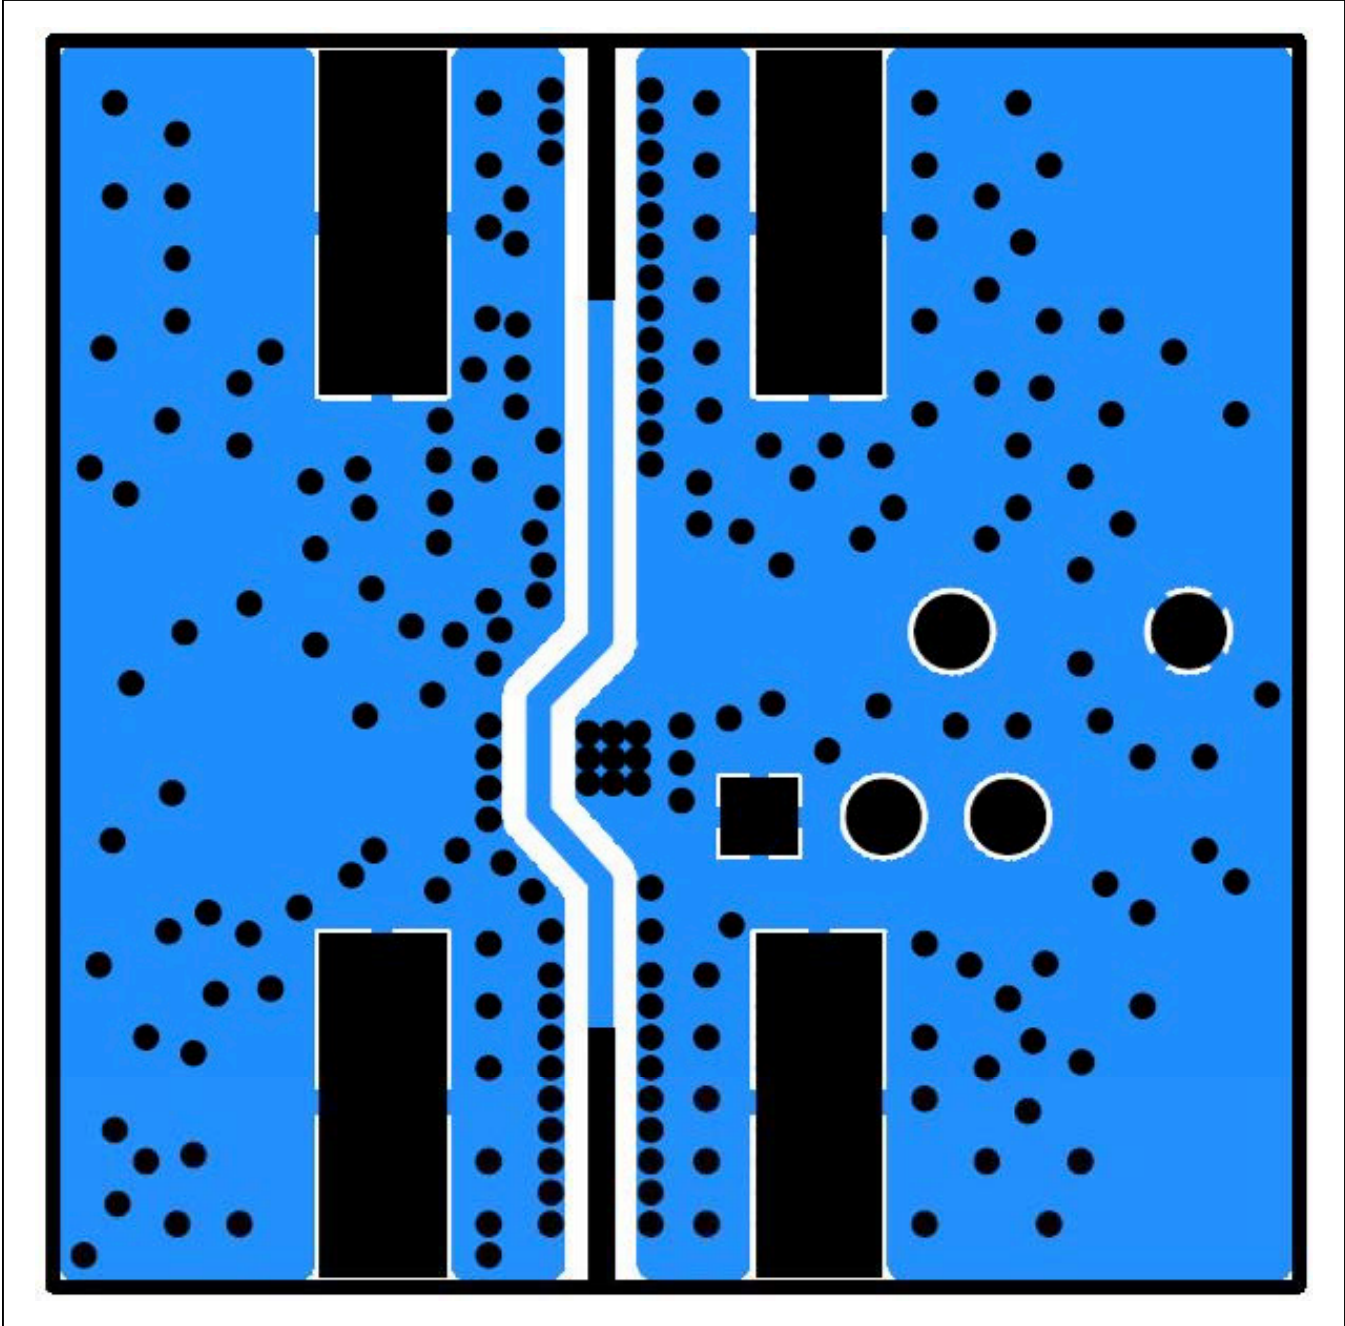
MAX2612–MAX2616 EV Kit PCB Layout—Secondary Side
